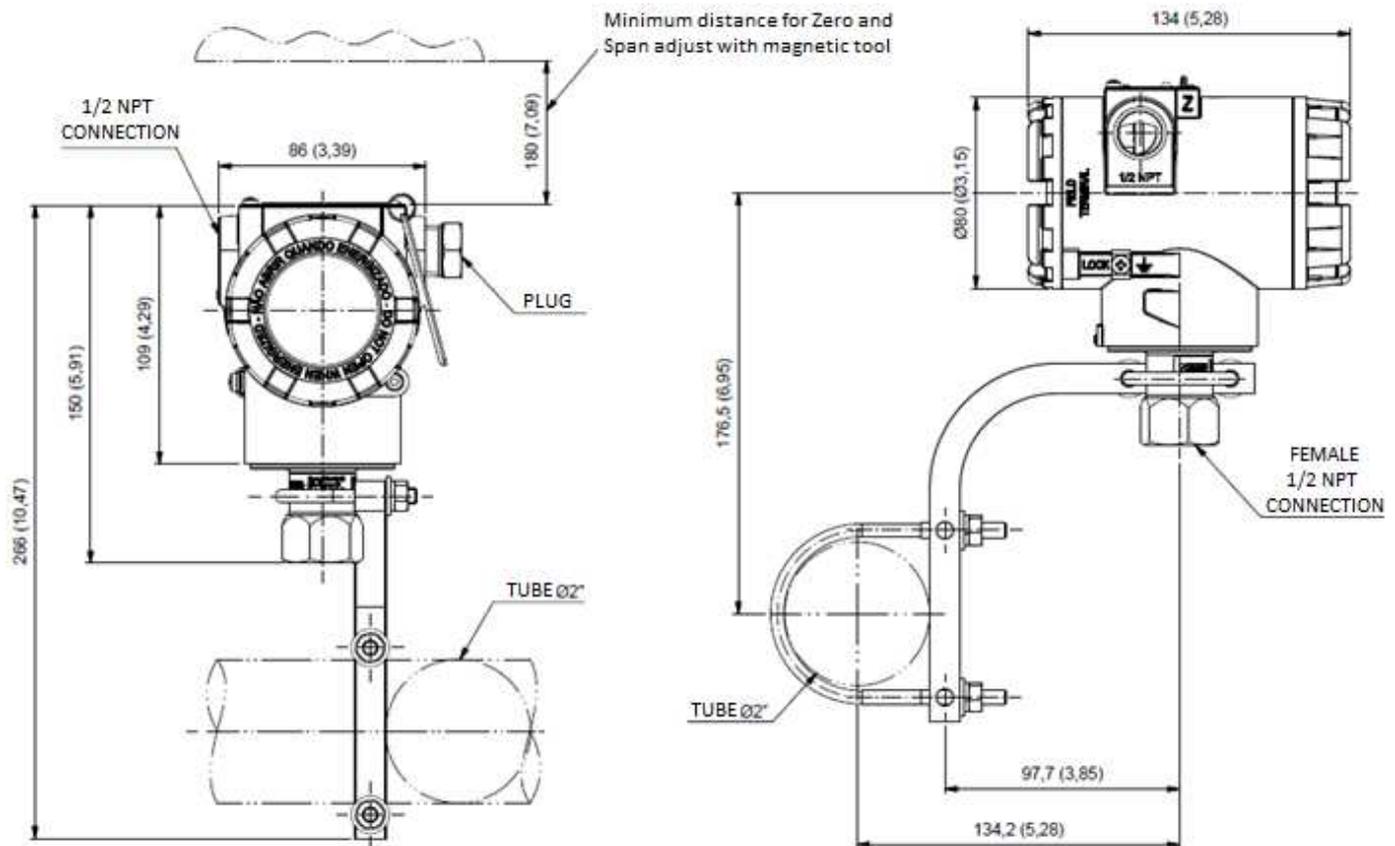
Dimensional drawing and mounting for VPT11-P.
